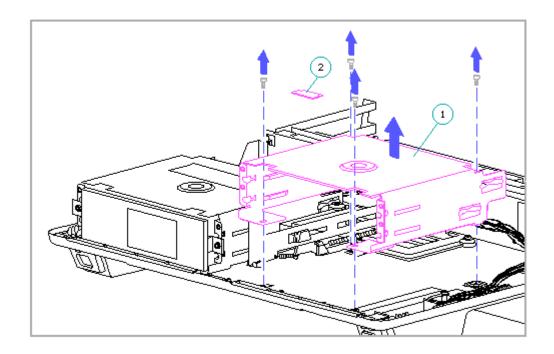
Removing the Drive Cage and the Drive Cage Spacer
